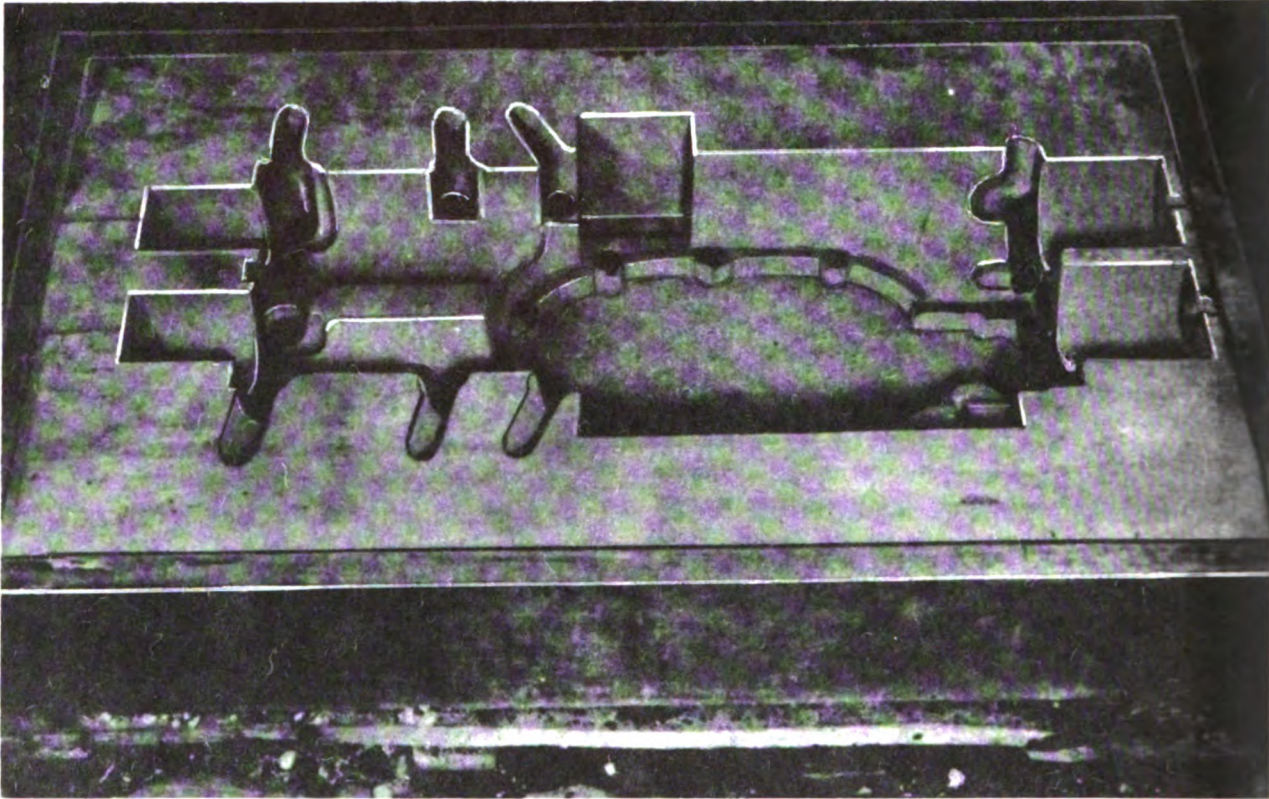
Use of external chills in a large mold for an aluminum casting.
